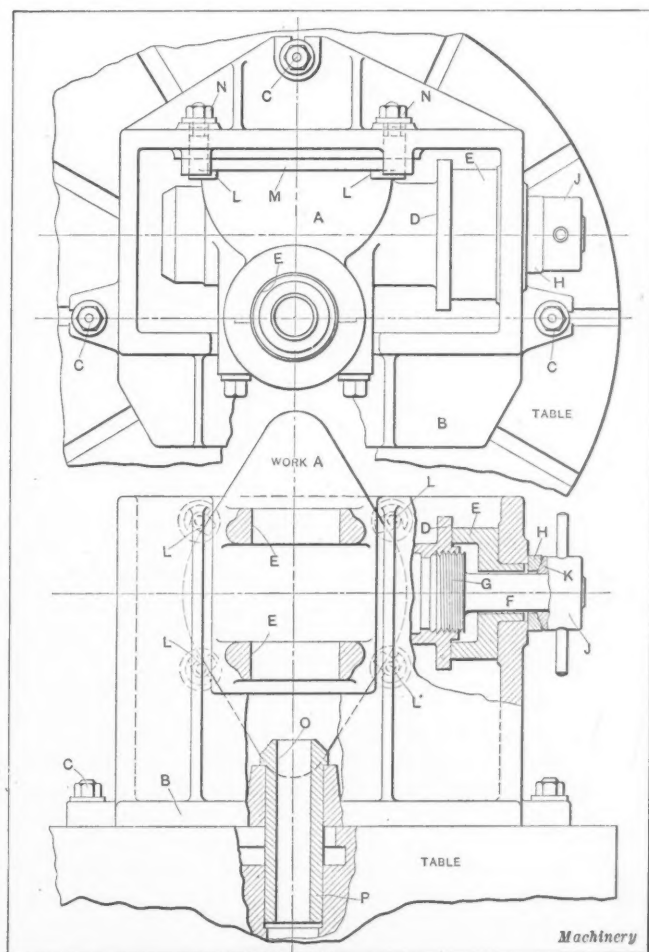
Fixture with Floating Locators to take Care of Two Finished Surfaces
